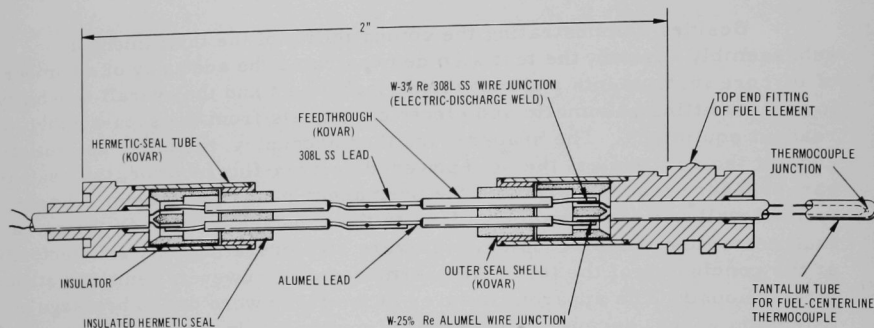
Assembly of Fuel-centerline Thermocouple for Subassembly XX01
